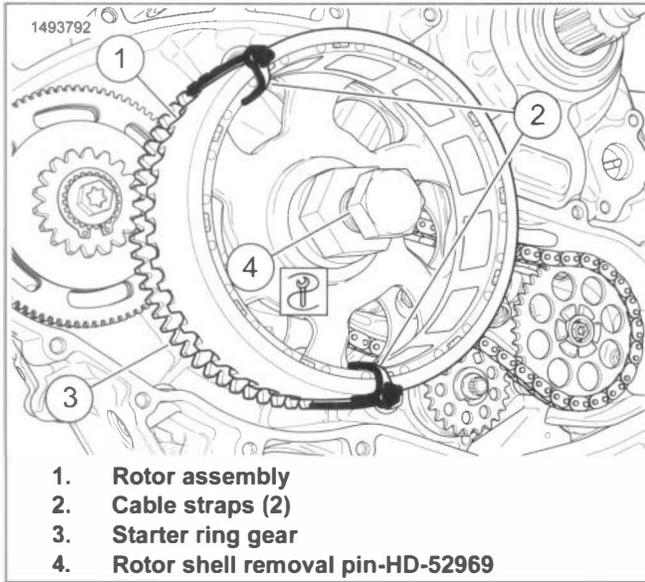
Rotor Shell Removal Pin - HD-52969
